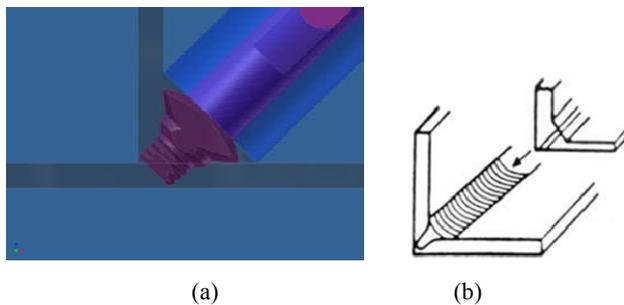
a) Welding tool for fillet connections; b) fillet joint.
